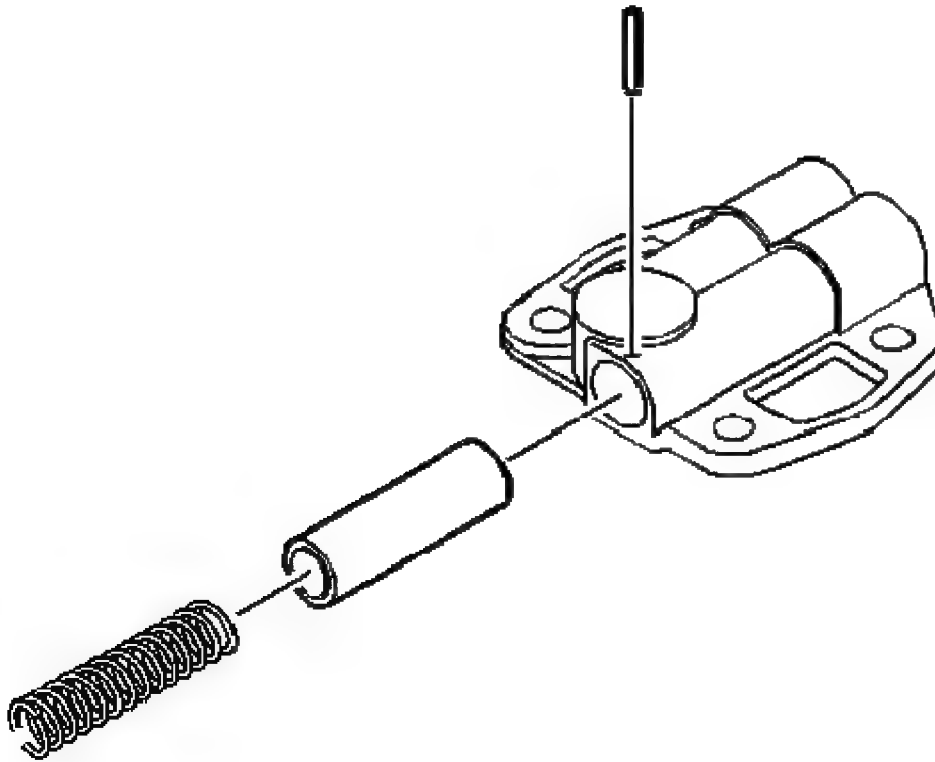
View Of Oil Pump Pressure Relief Valve, Spring & Spring Straight Pin
